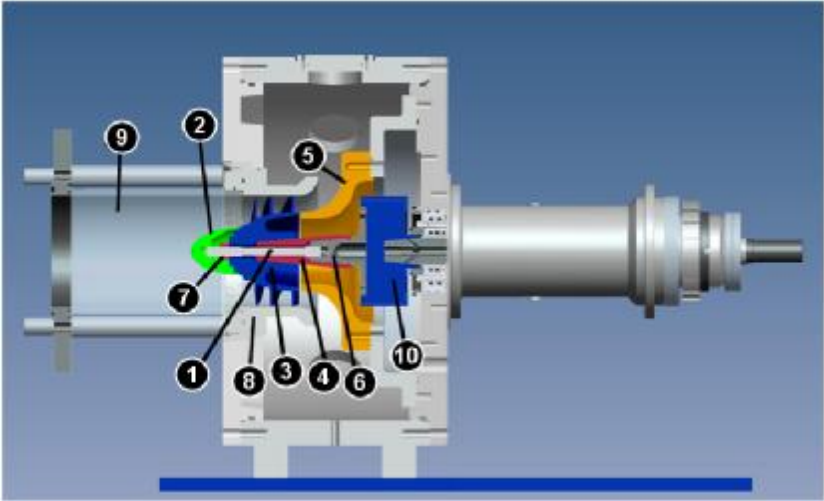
Rendering of the CPRTF test chamber assembly and its major components: (1) and (7) inducer fastening bolt, (2) inducer ogive, (3) inducer, (4) and (6) reference pins, (5) diffuser, (8) inducer casing, (9) transparent inlet duct, (10) rotating dynamometer.
